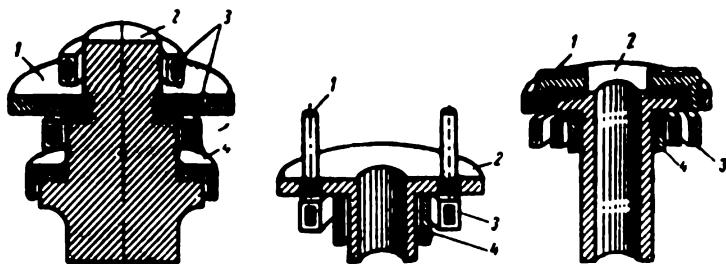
Position of parts 1 and 2, of the inductor coil 3, and the shield 4, in soldering tubular assemblies
